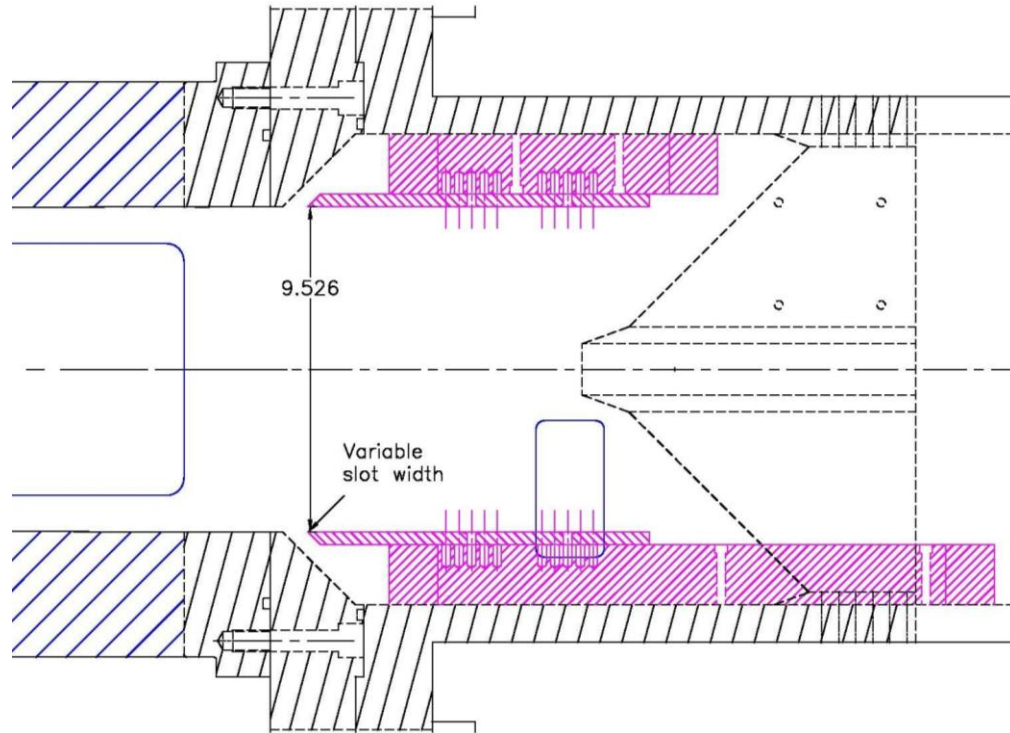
Schematic of steel straight-pipe insert in modified tunnel section. Dimensions in inches.
